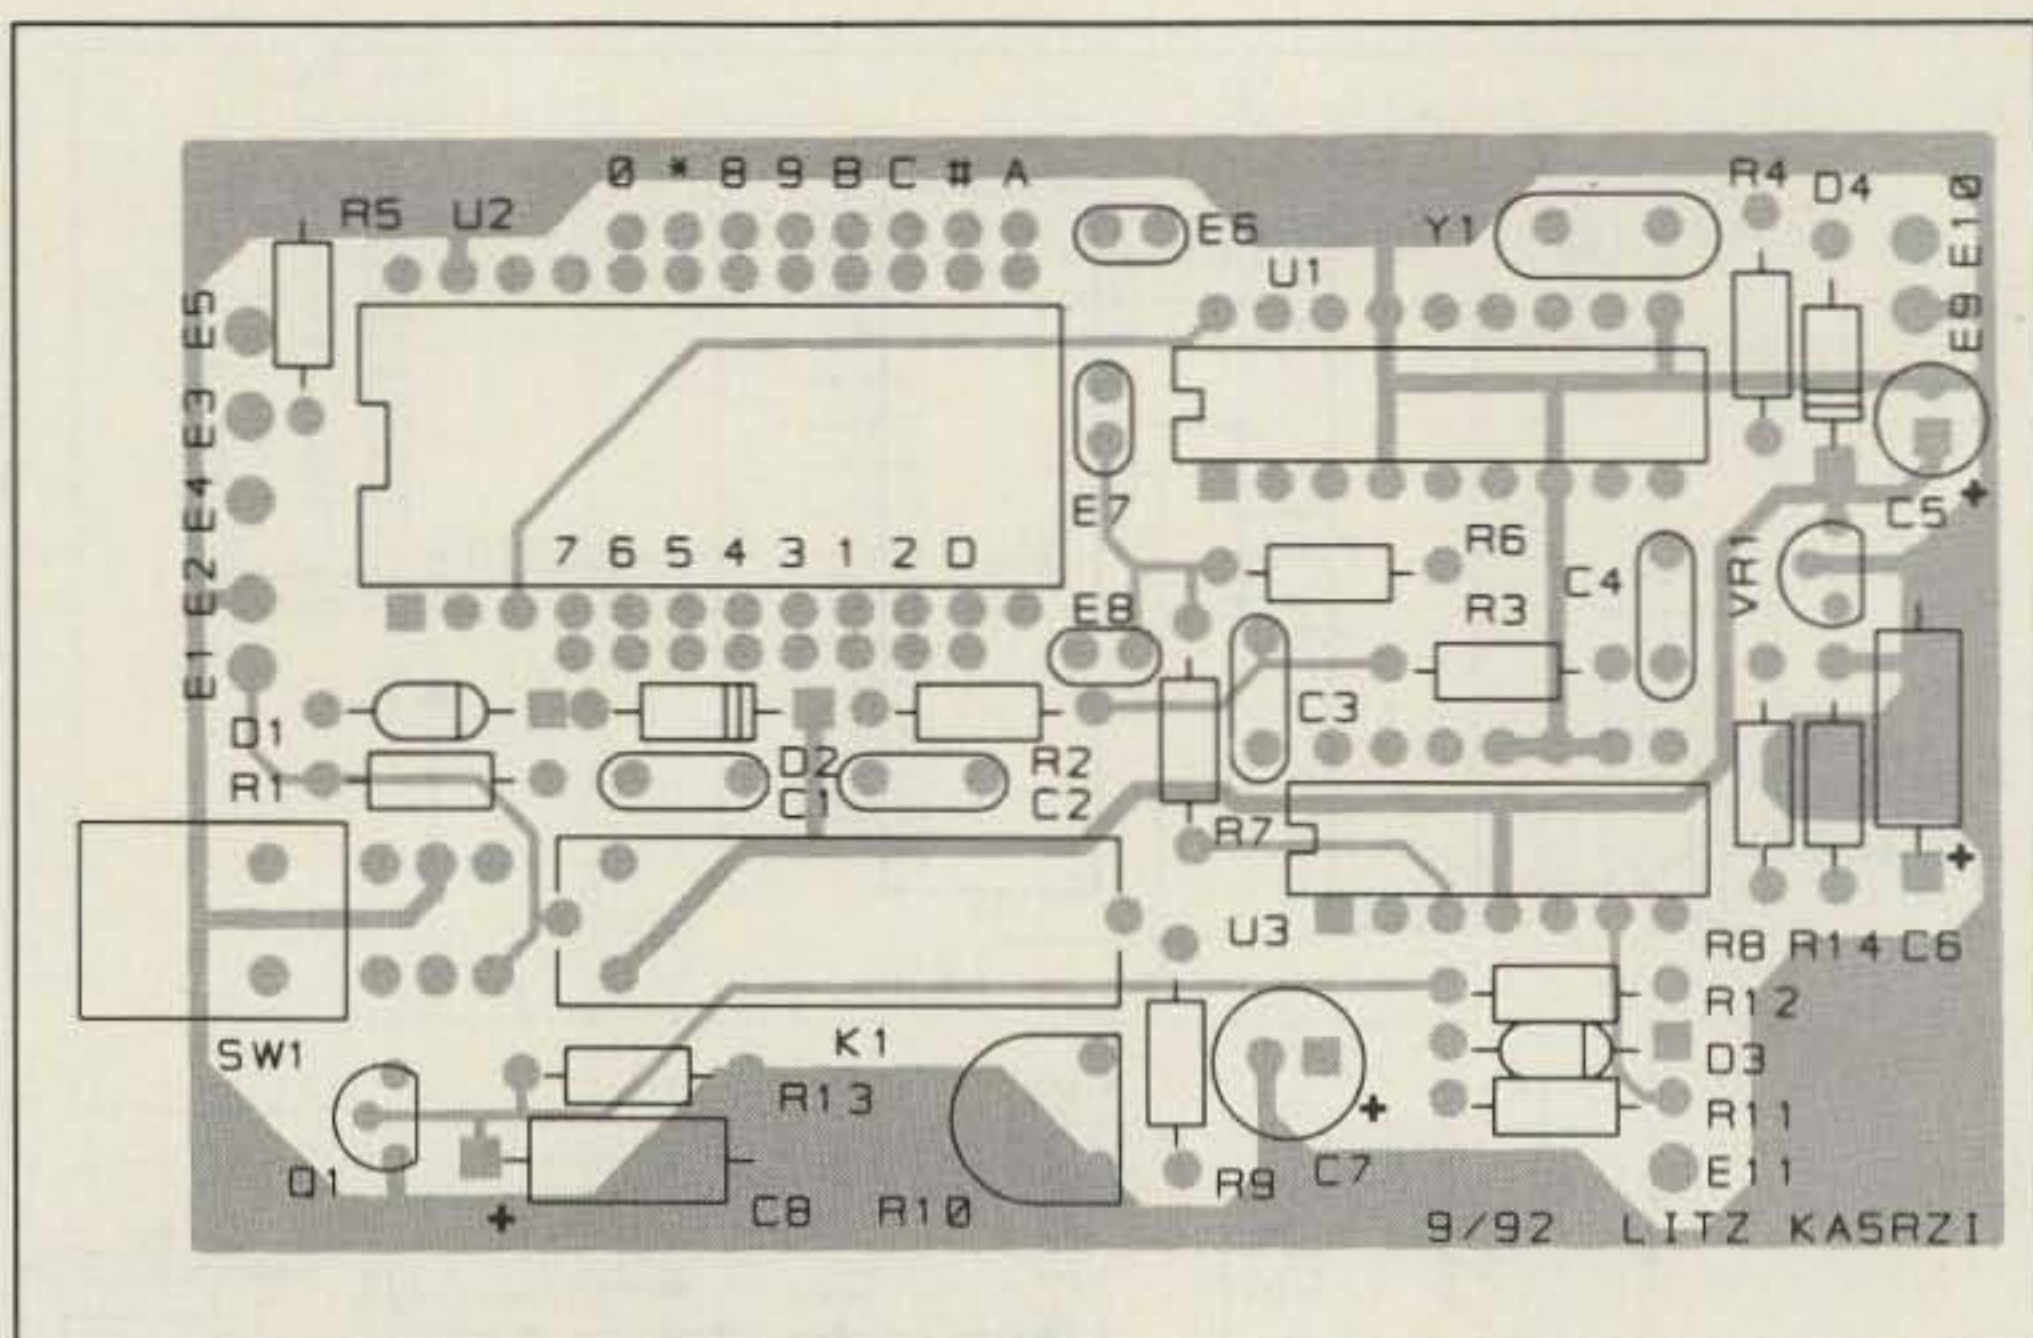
Parts placement diagram. (If you make your own PC boards, you will need to solder leads on both sides where necessary. This won't be necessary if using the board available in the parts list since it has plated-through holes.)
